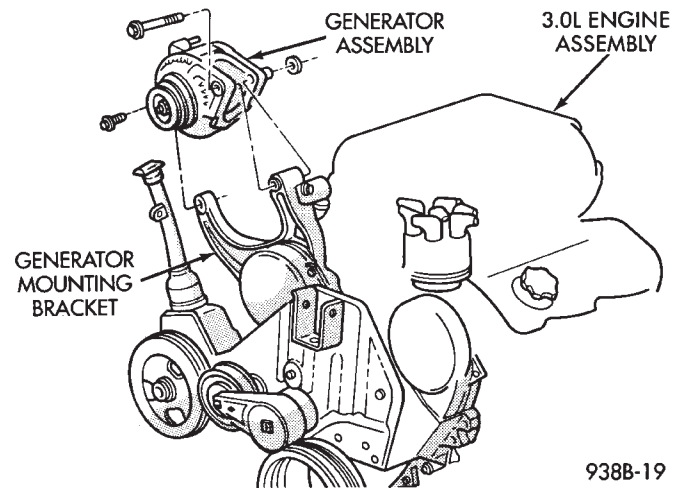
Remove or Install Generator Mounting Bolts—3.0L Engine
